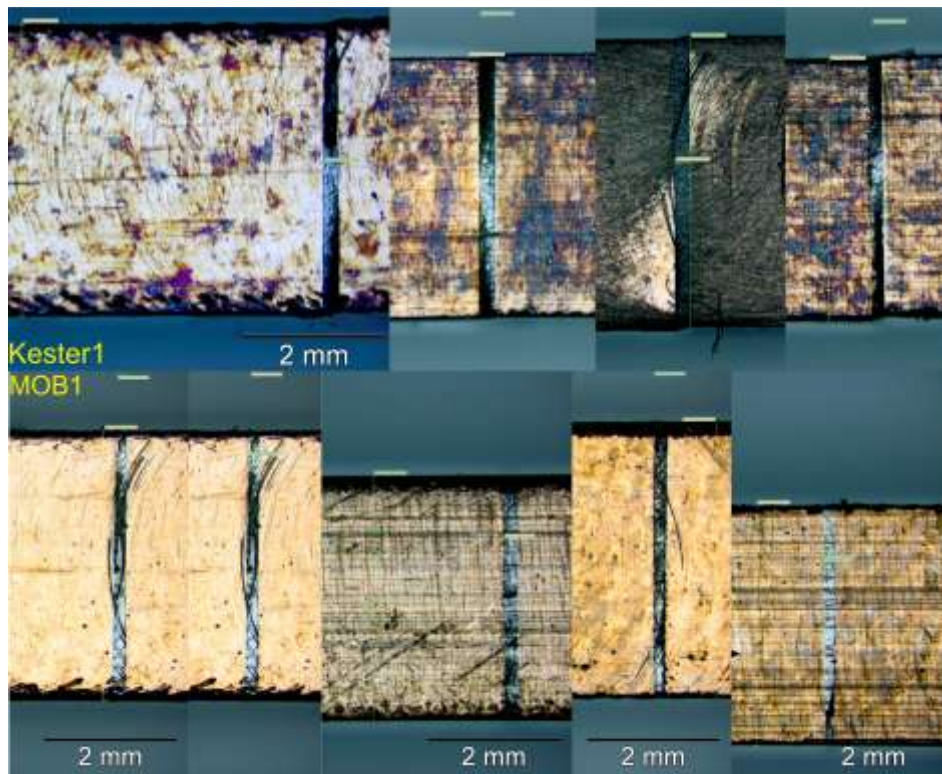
Macroscopic images of the solder joint of Kester1 and MOB1.
